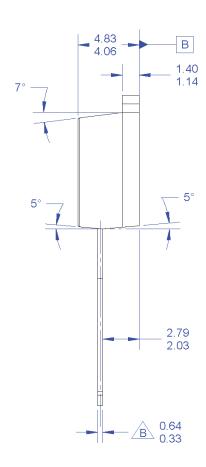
TO263 (D²PAK), Molded, 2-Lead, Surface Mount
